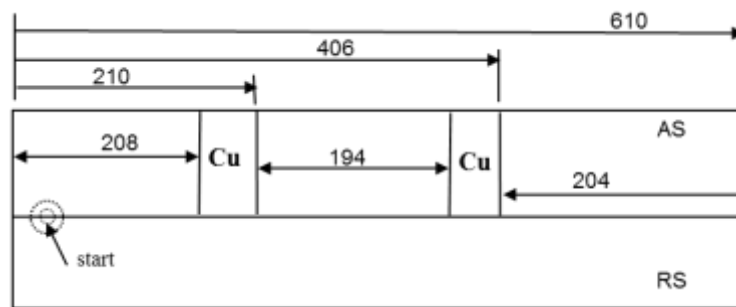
Configuration of weld panels with Cu plating over a 38mm wide zone. Units are in mm.
